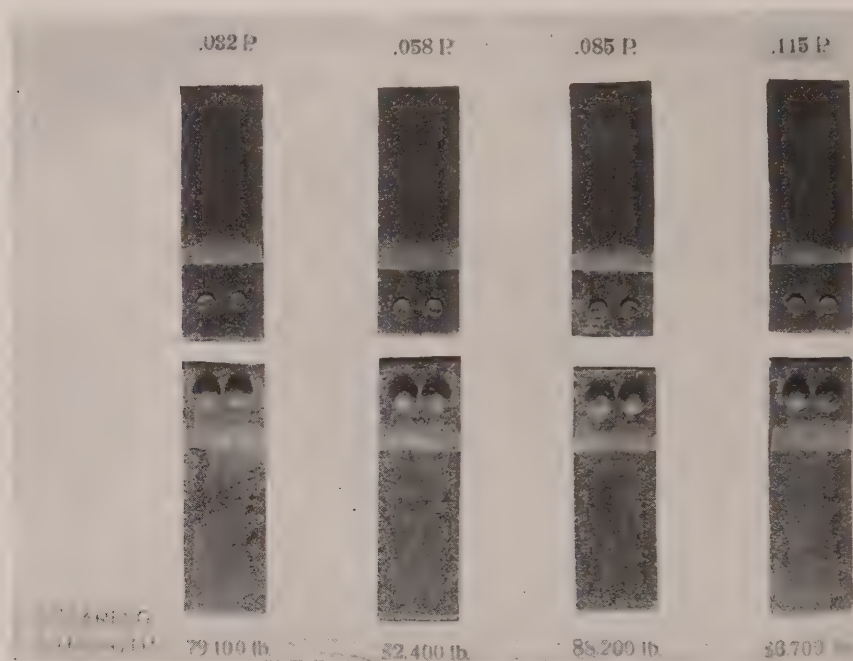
Shearing Test of One-inch Acid Open Hearth Riveted Joints
